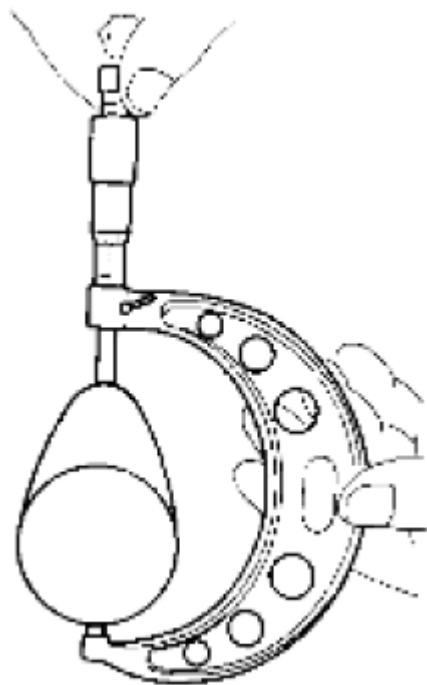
Measuring Camshaft Cam Height With Micrometer
